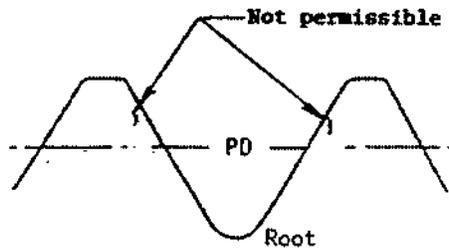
Laps Above PD Extending Toward Root, Rolled Thread
